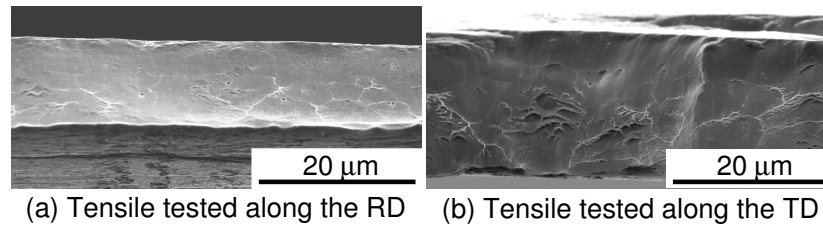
Fracture surfaces of the 99% cold-rolled, 23  $\mu\text{m}$ -thick foils (DS24-47) after tensile tests along (a) the RD and (b) the TD.
